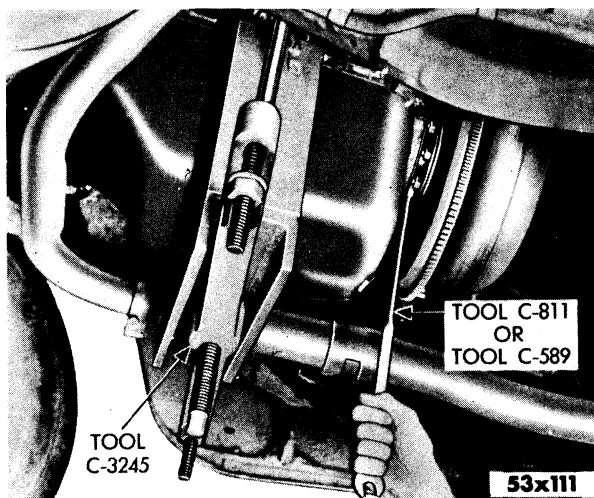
Removing or Installing Torque Converter Mounting Stud Nuts
